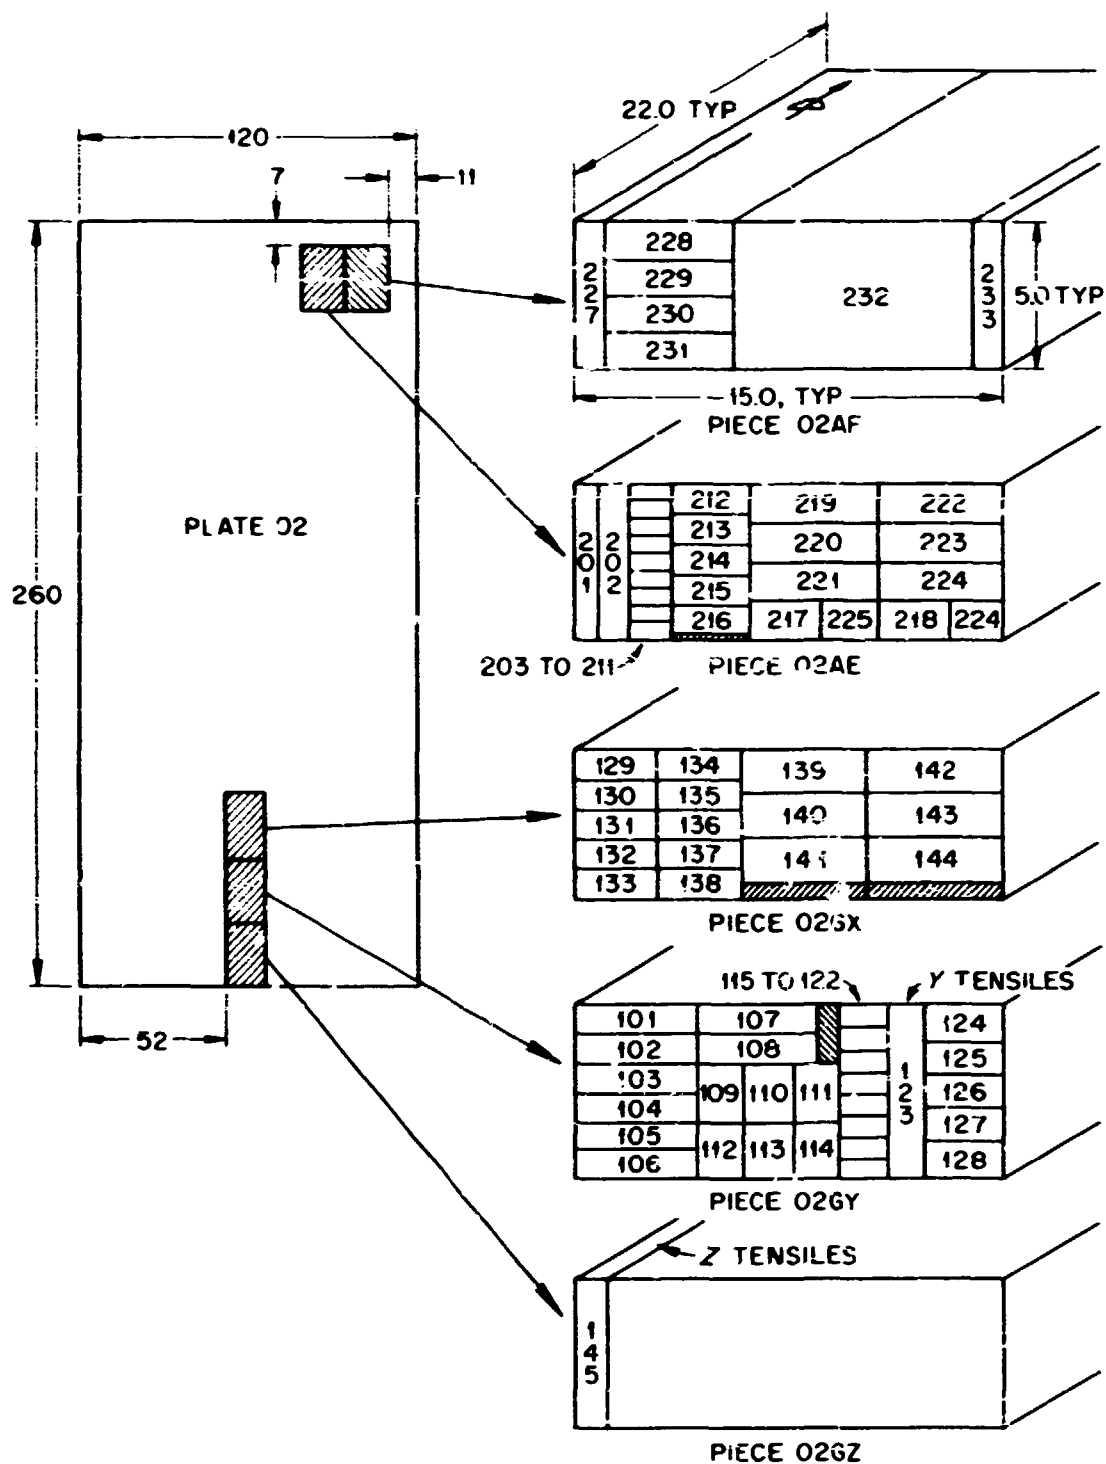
Layout of specimens showing their locations in plate 02. All blocks were cut with 5-in. thickness centered on the plate midplane.
